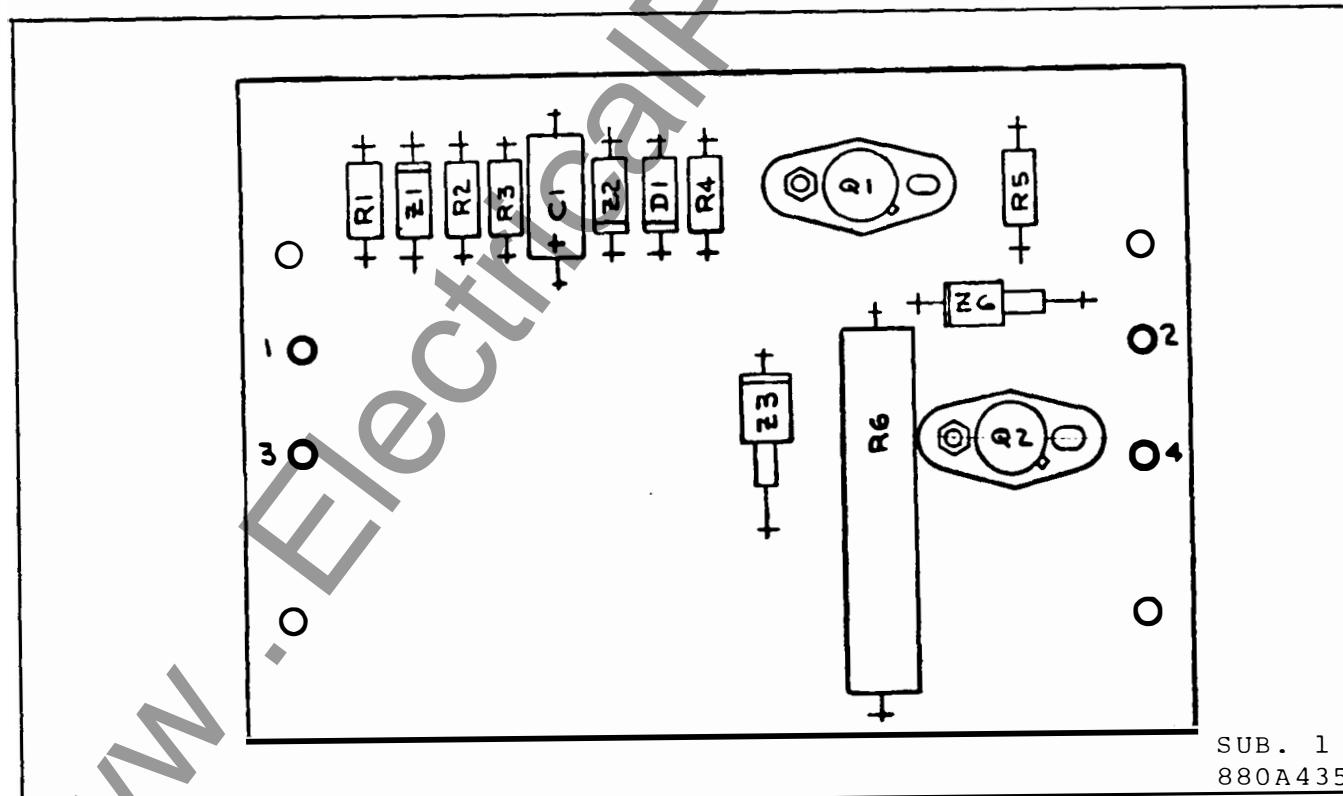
Component Location Single Input Buffer in FT-11 Case 125 VDC.
